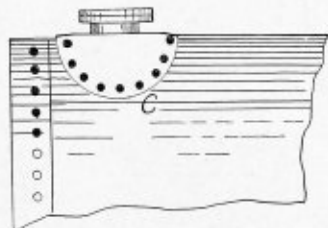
AND A FLANGED FITTING RIVETED IN ITS PLACE.
